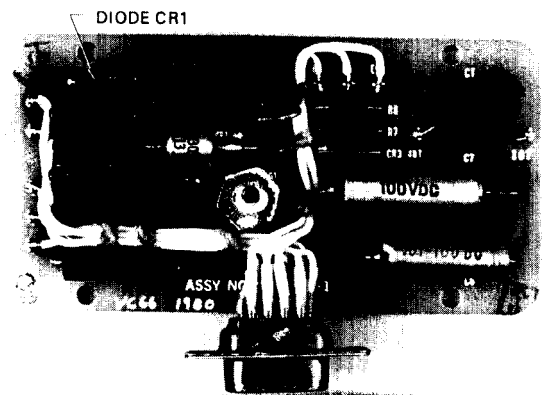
Modulator and protective circuit printed wiring assembly with burned-out diode CR1 (rating: 45 ± 1 percent)
